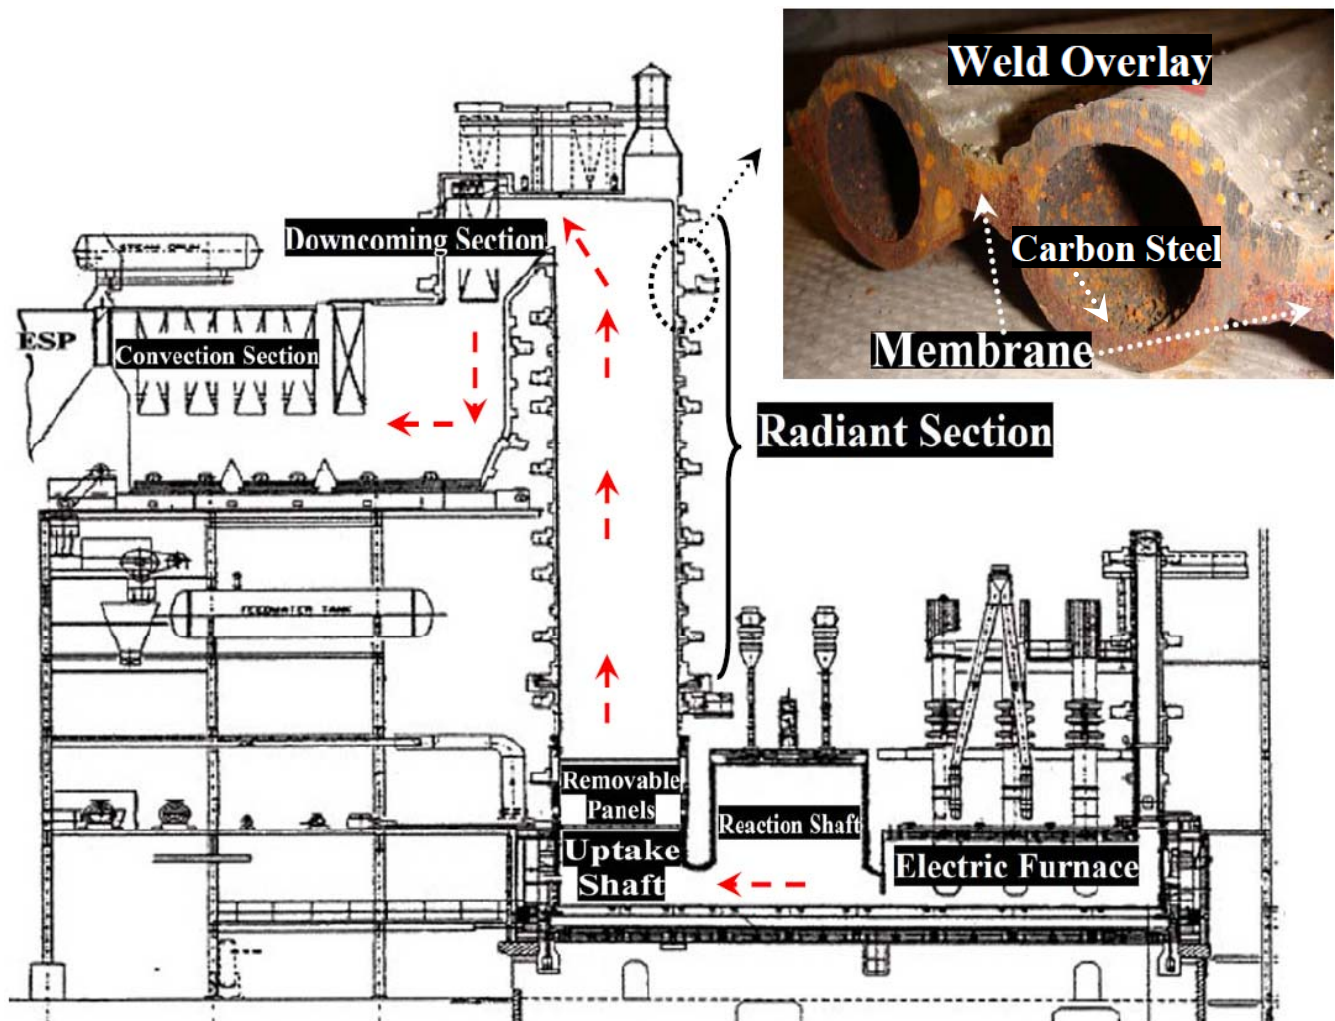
Schematic image of the KIVCET waste heat boiler and an image of the weld overlaid waterwall tubes in the radiant section of the boiler [5].
